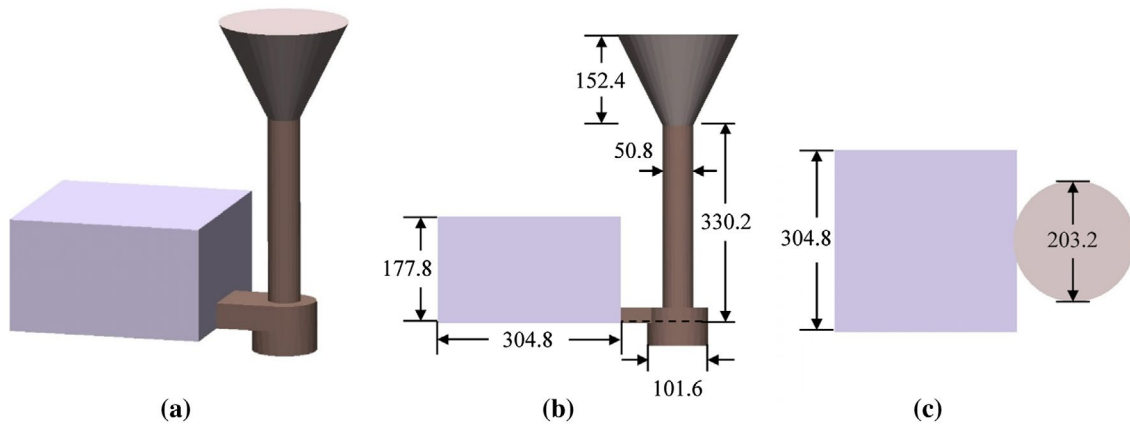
Gating system and casting geometry for the cone pouring cup with bottom ingate cases: (a) isometric view, (b) front view and (c) top view. All dimensions in mm.
